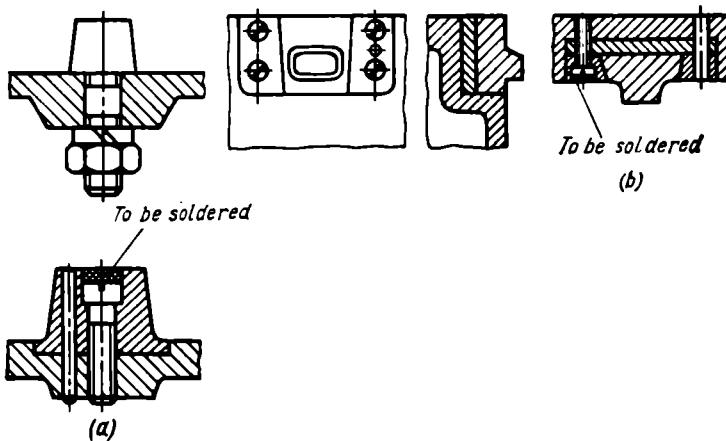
Design of core-prints (a) and detachable parts (b) fastened to metal patterns
